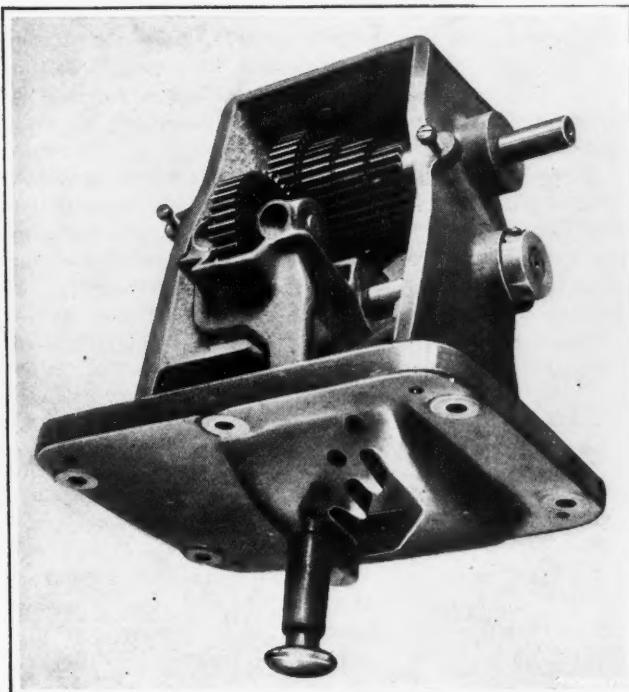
Change-gear Box controlling Speed of Magnetic Chuck Spindle
